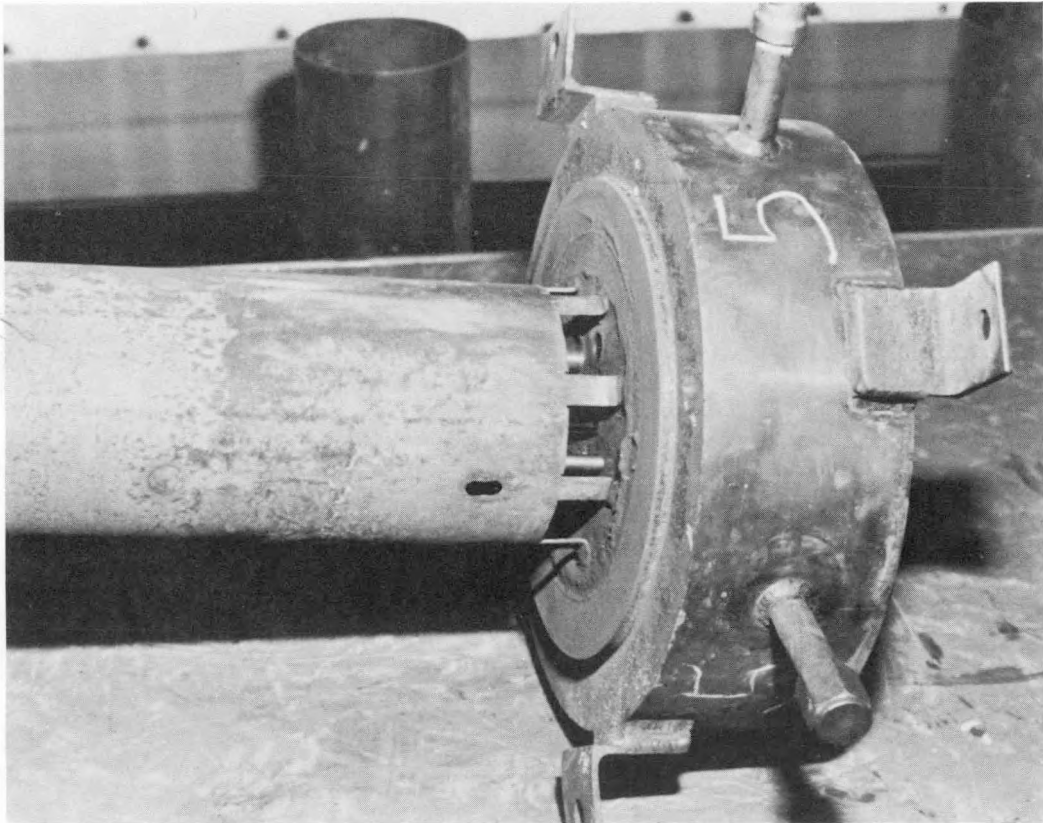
Unit No. 5 After Cleaning (Flange and Shroud).
